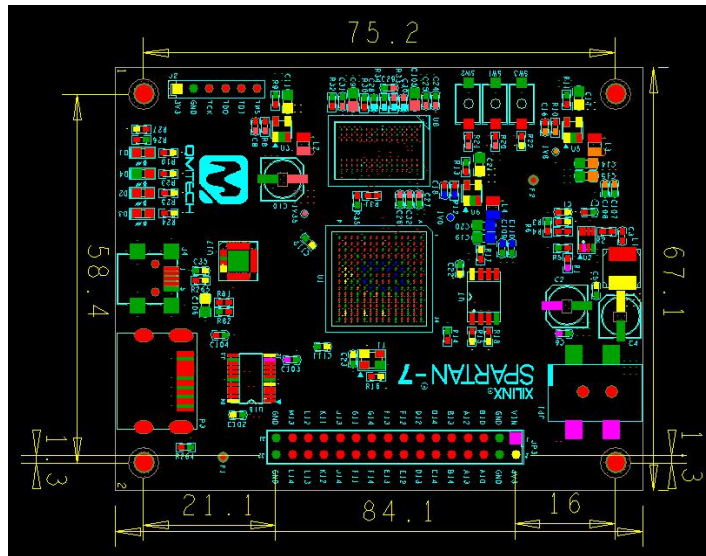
QMTECH Spartan-7 Starter Kit Dimension
